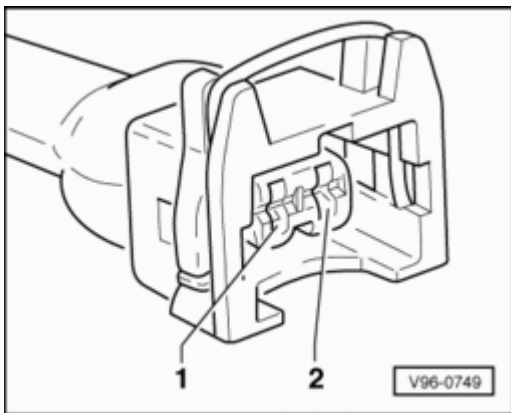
Identifying 2-Pin Electrical Connector & Terminals
